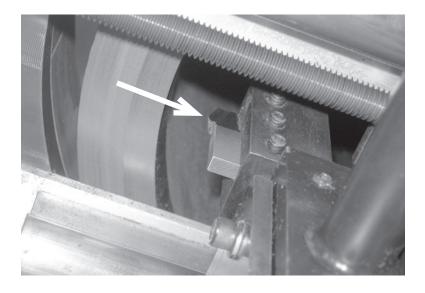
Make sure the tool is within the pipe's I.D. before advancing the male slide into the pipe.
